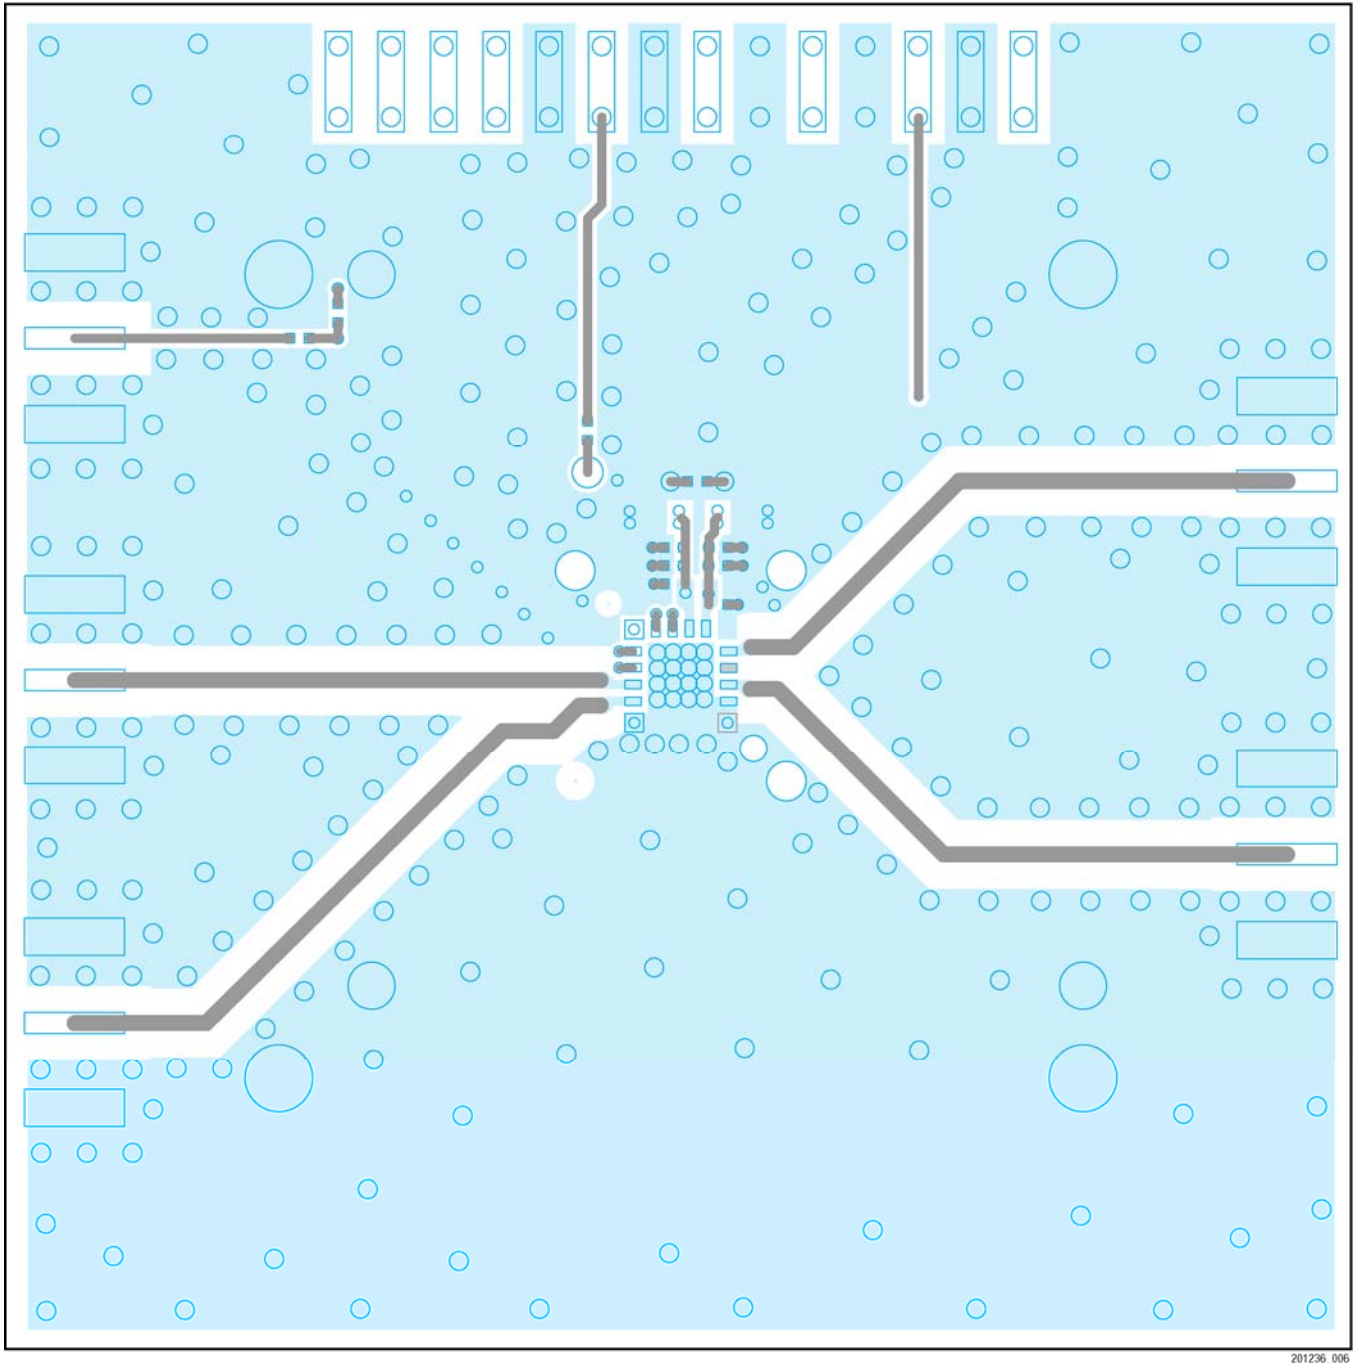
SKY77344-21 Power Amplifier Test Fixture PCB Layer 1
